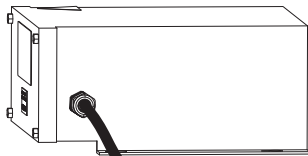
Conduit and Cord Grip InstallationConnect the Ram Transformer Power
